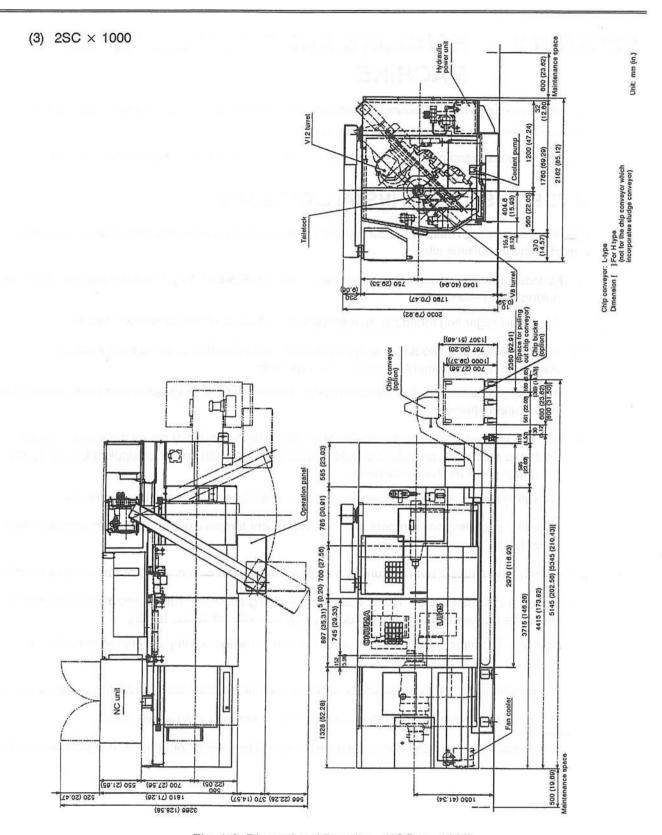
Dimensional Drawings (2SC × 1000)
